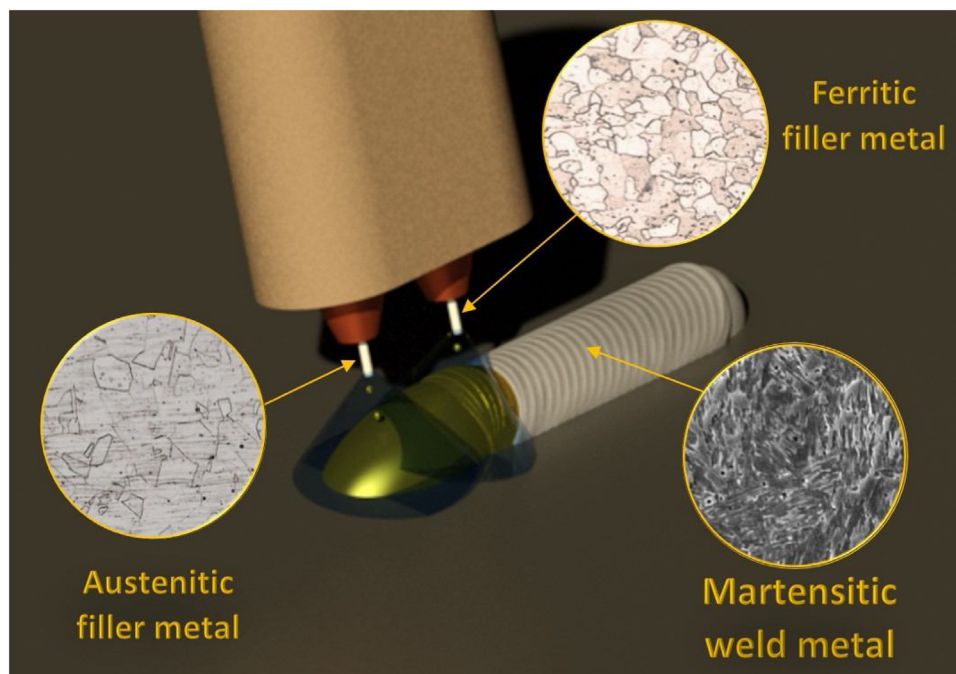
Drawing showing the Tandem GMAW torch and weld bead details during the welding. The differences in terms of microstructure of each wire for this specific application, and the microstructure in the weld fusion zone are also shown.
